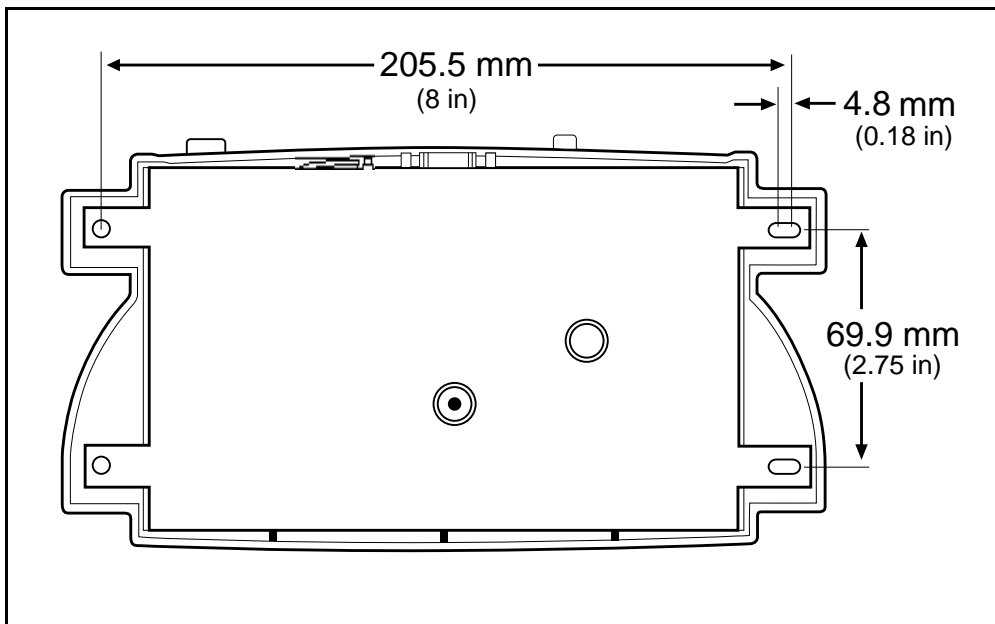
CrossCheck GPRS Mounting Dimensions
